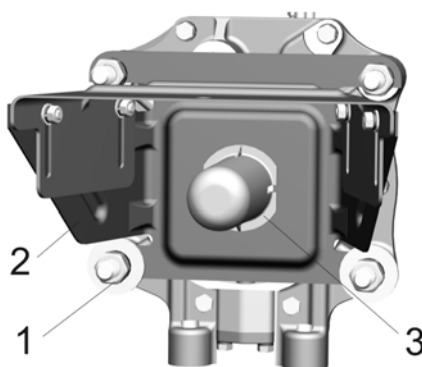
Disassembly of PTO shaft end extension cap safeguard
